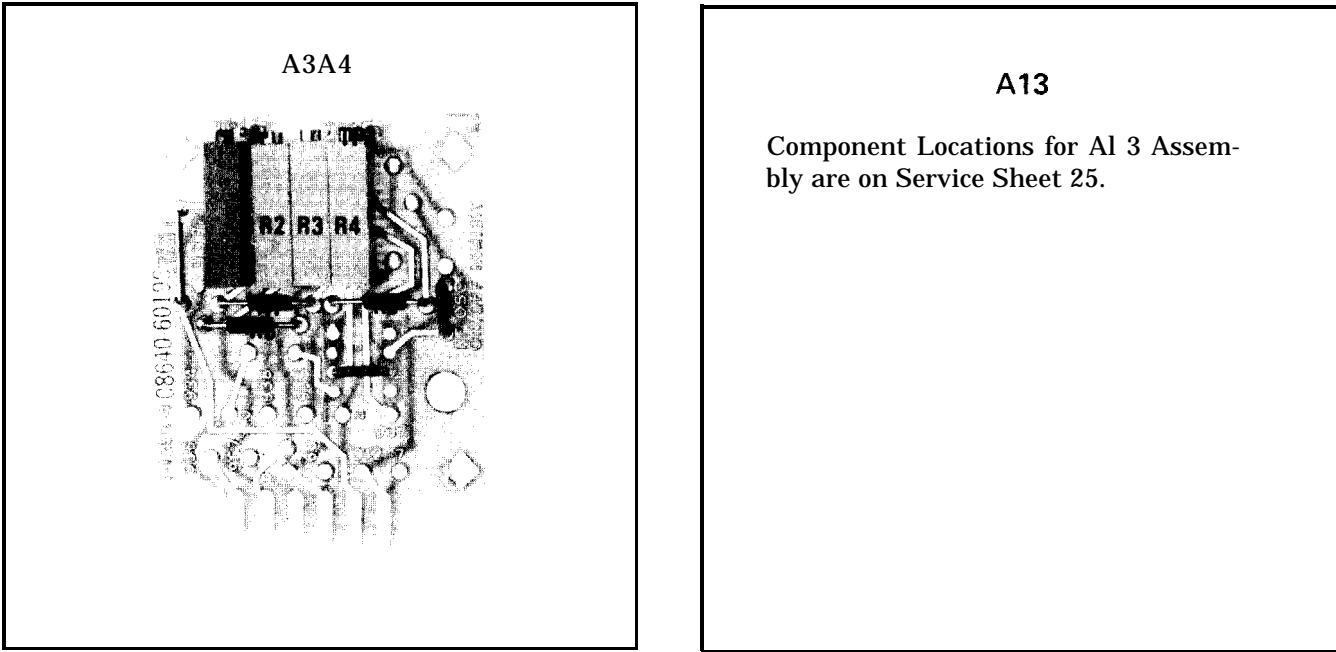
P/O A3A4 Connector Board Assembly Component Locations
